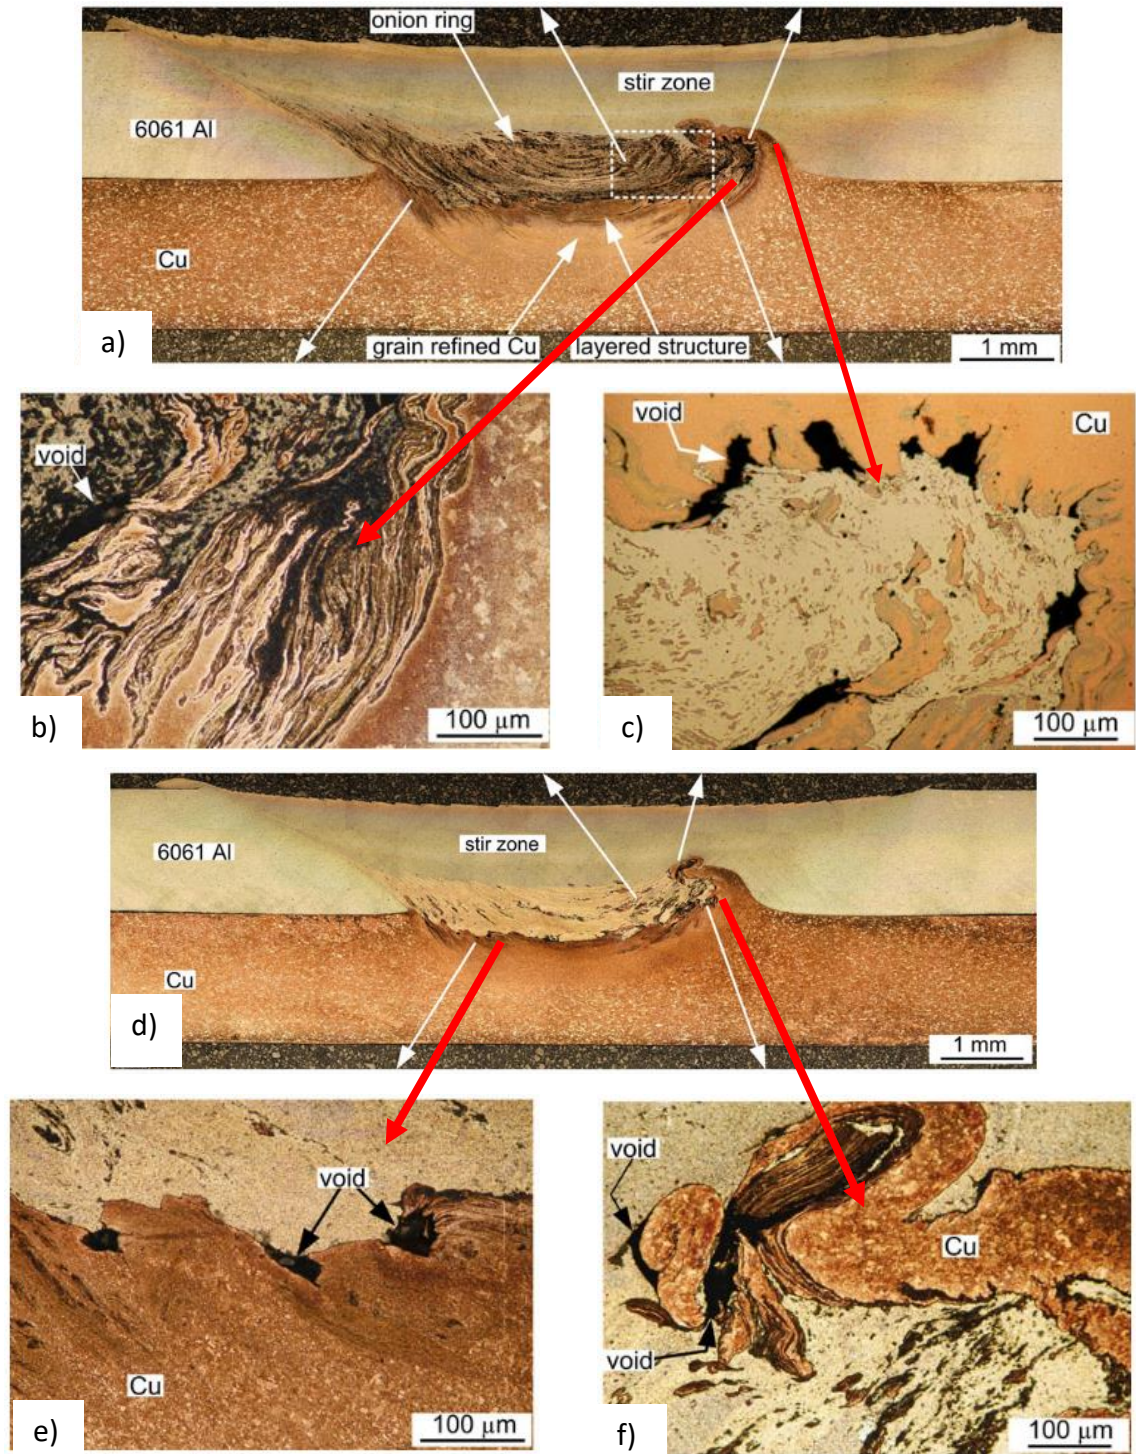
4 Weld interfaces from Firouzdor and Kou, with a ω of 1400 rpm. (a) weld interface using v of 38 mm/min, (b) void formed in the interface in RS region, (c) voids in copper flash hooks (as polished condition), (d) weld interface using v of 203 mm/min (e) typical voids formed in the interface, (f) voids formed in the copper flash hook [93].
